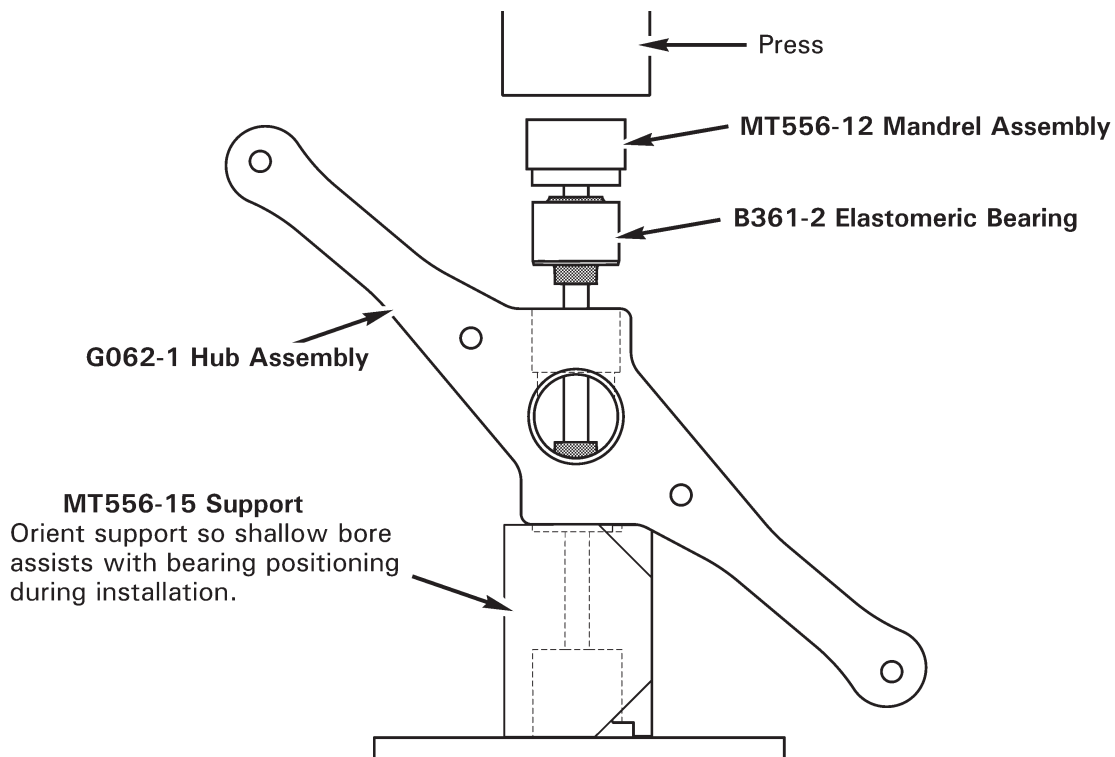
ELASTOMERIC BEARING INSTALLATION
